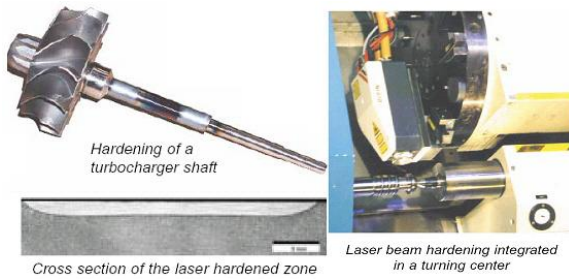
Laser hardening of turbocharger shaft (Fraunhofer USA)
